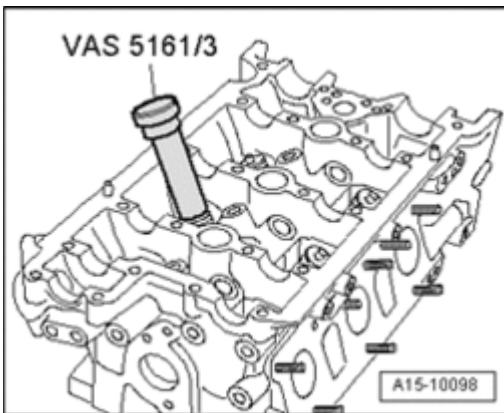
Placing Drift VAS 5161/3 On Valve Spring Plate And Loosening Stuck Valve Keepers Using Plastic Hammer
